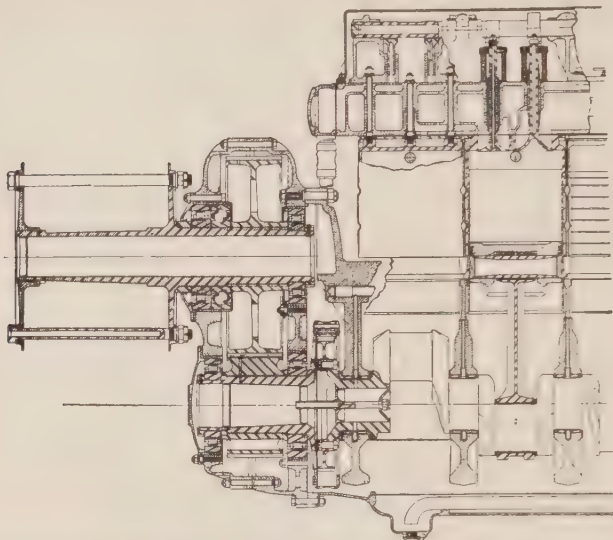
Spur-type propeller-reduction gear. (Courtesy Packard Motor Car Co.)
